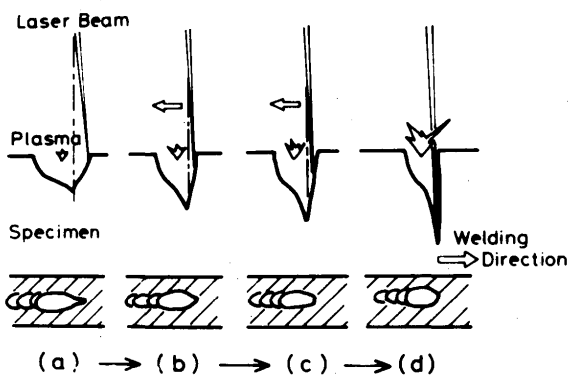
Mechanism of Laser Spike Seam Welding.
